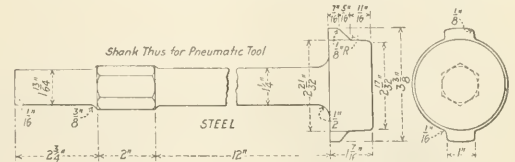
Arch Tube Tool Recommended for Flaring Ends
